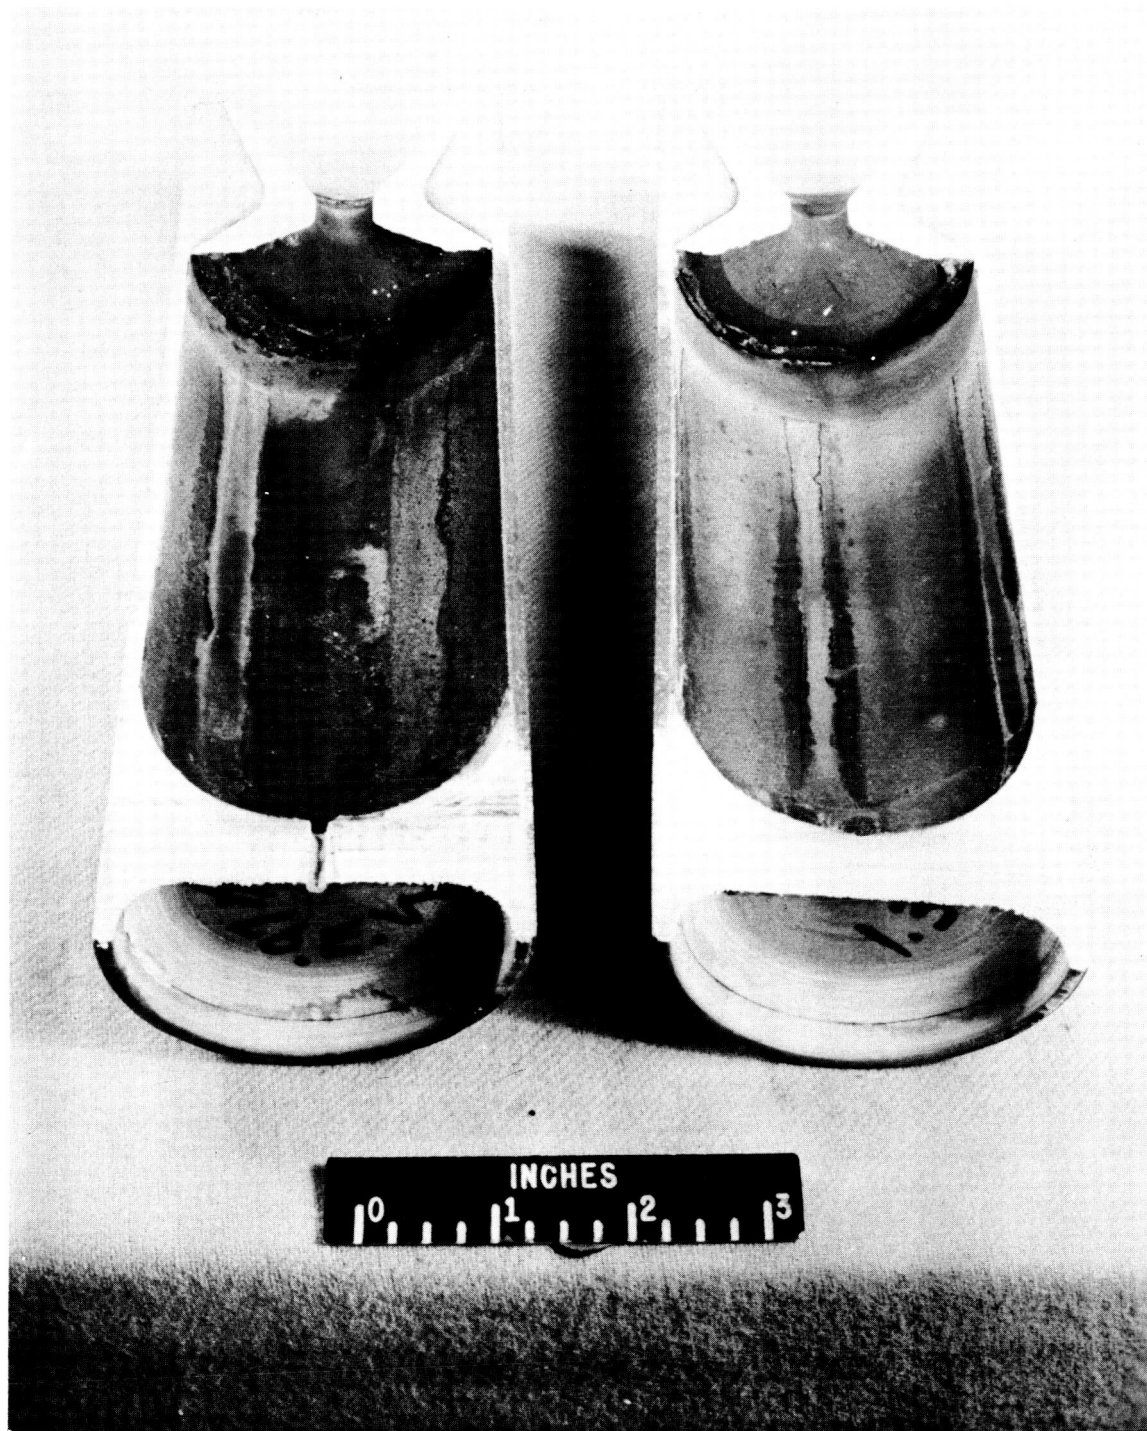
View of plastic rocket case, head cap, and nozzle. L-58-95
